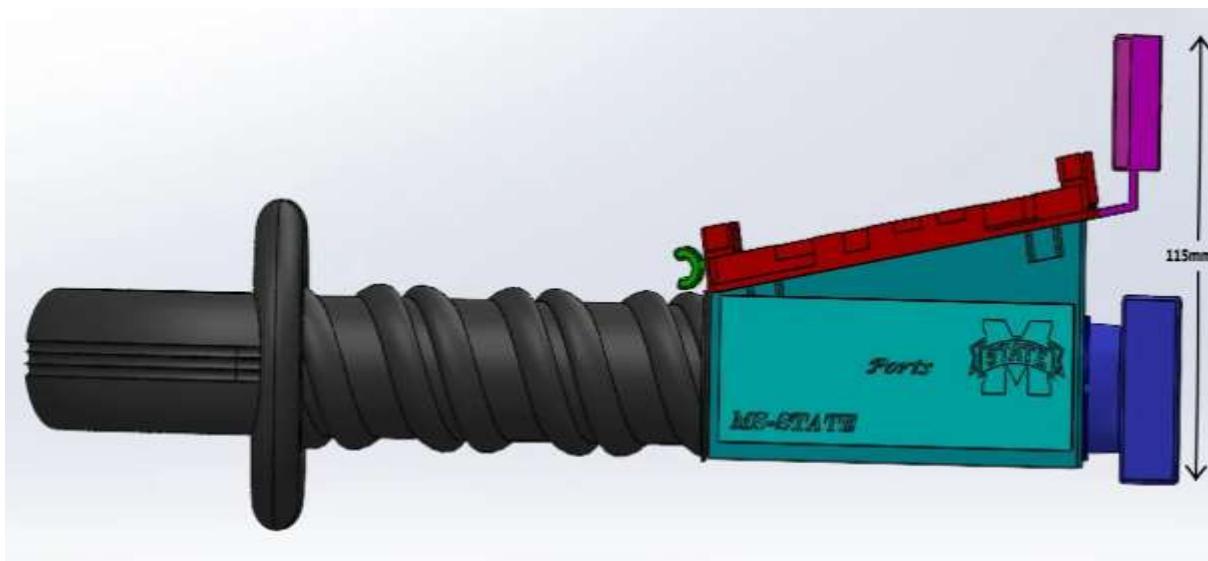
Final Assembled Design of product in right view in SOLIDWORKS
